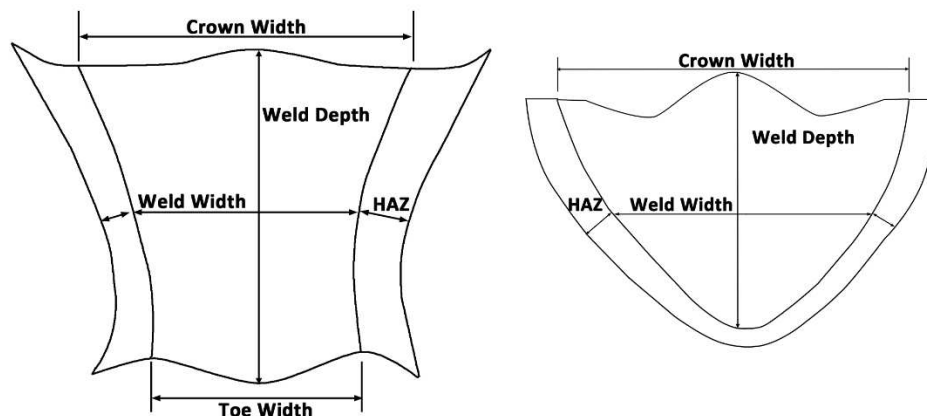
Schematic drawings to show the dimensional measurements of weld pool.
